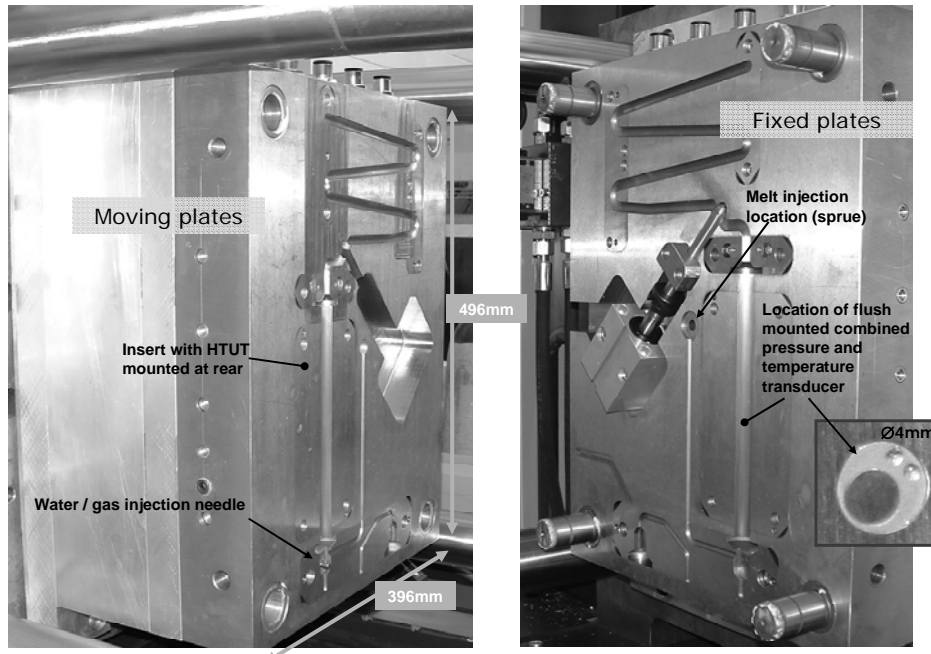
The combined water and gas assist moulding tool showing a cavity form that is made up from interchangeable inserts. The $\text{Ø}20\text{mm}$ straight tube insert fitted with HTUT (moving side) along with combined peizo-electric pressure and thermocouple temperature transducer (fixed side) is shown.
